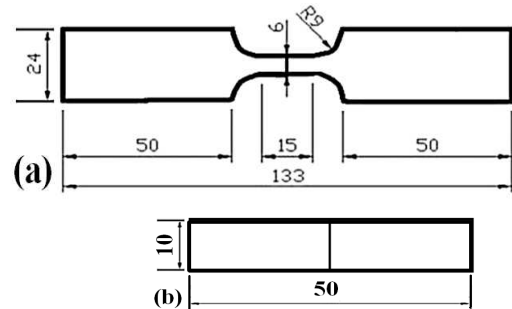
Shape and dimensions of the specimen (mm); (a) Tensile test specimen, (b) Bending test specimen
